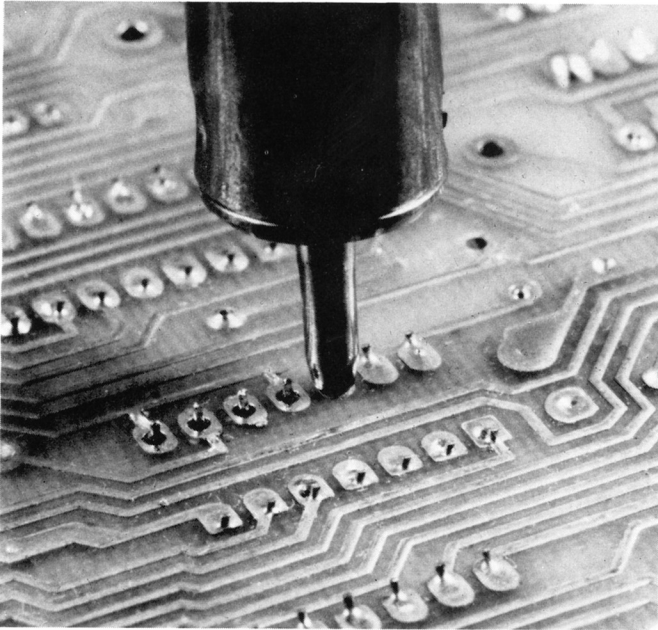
Desoldering of Dual In-Line Pack using a heated Solder Extractor having continuous vacuum. Desoldering performed on a lead-by-lead basis.
